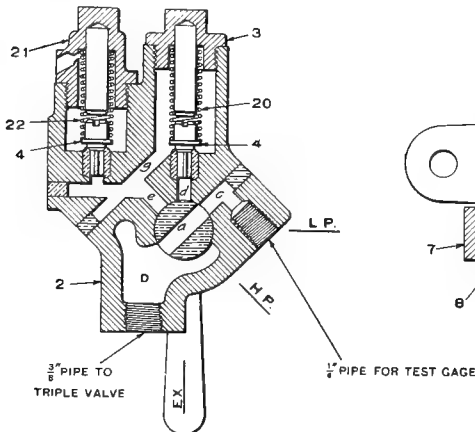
Spring Type Double Pressure Retaining Valve.
